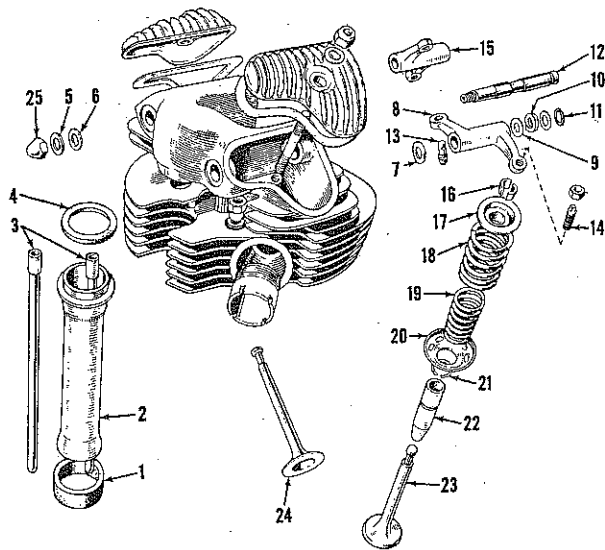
Exploded view of the cylinder head. Inlet and exhaust valve springs are interchangeable.
